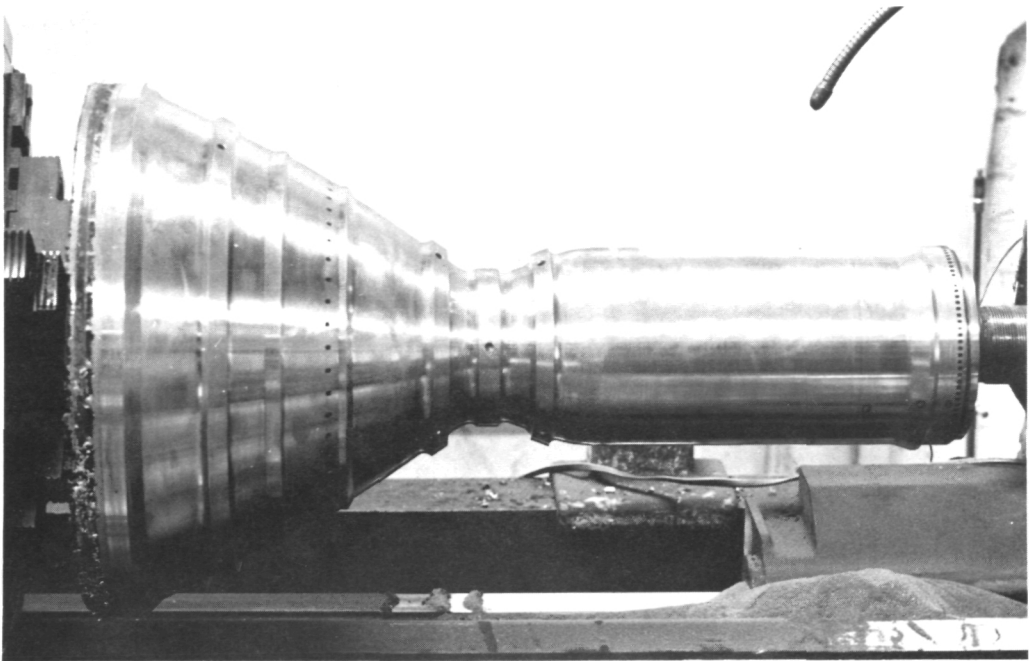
Final machining of electroformed nickel outer jacket before welding on the manifolds and flanges.
